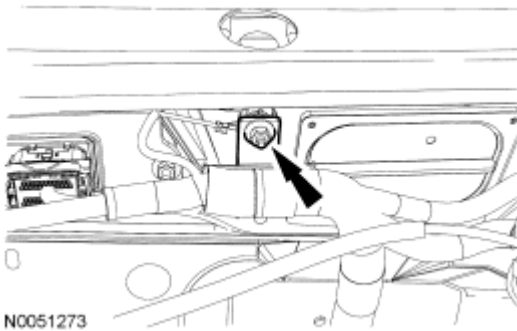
Locating PCM Wiring Harness Bracket & Nut
